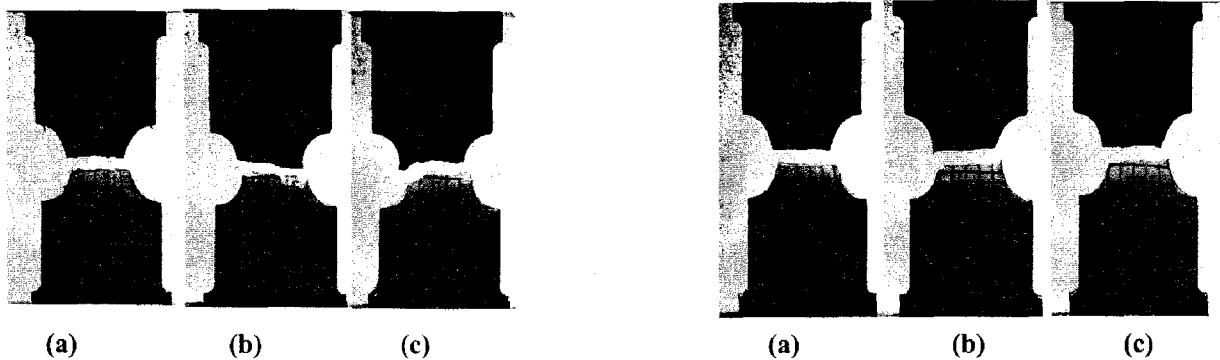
Fracture shape of SAPH440: a)reaming ; b)punching, Fig. 4 Fracture shape of FB590: a)reaming ; b)punching, clearance 8%; c)punching, clearance 16%
